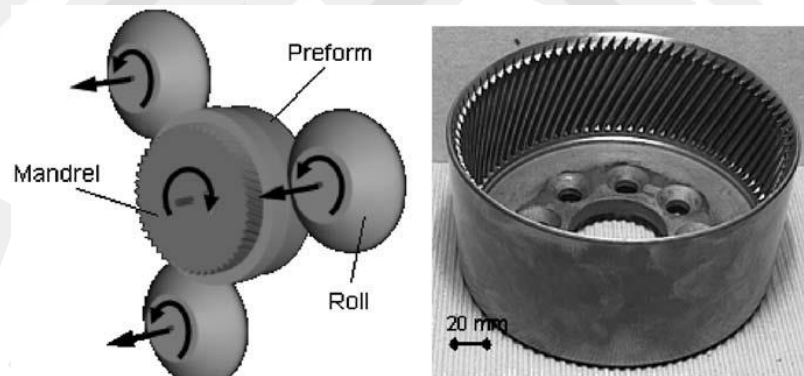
Three-rolls-principle and produced internally geared wheel, [5]
